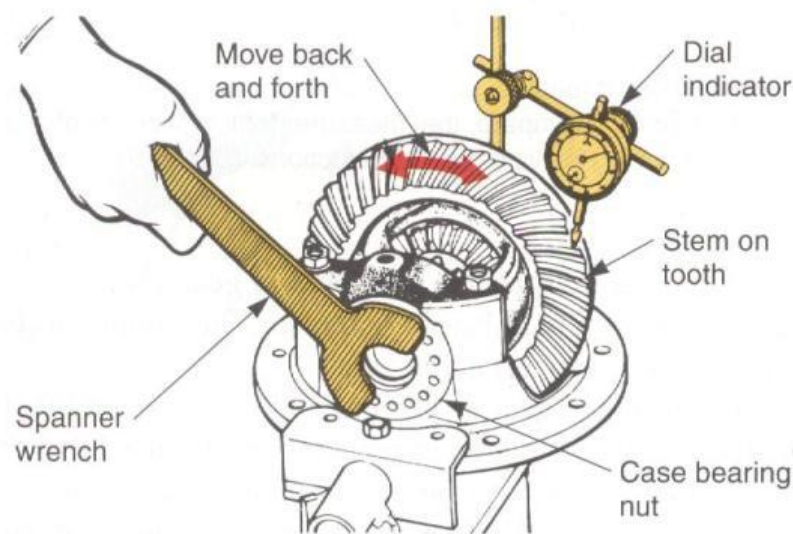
After setting pinion bearing preload and depth, adjust backlash and case bearing preload. This unit is adjusted by turning nuts. The indicator is mounted with the direction of gear rotation, touching the outer end of the tooth. Hold the pinion stationary and move the ring gear back and forth while watching the indicator.
